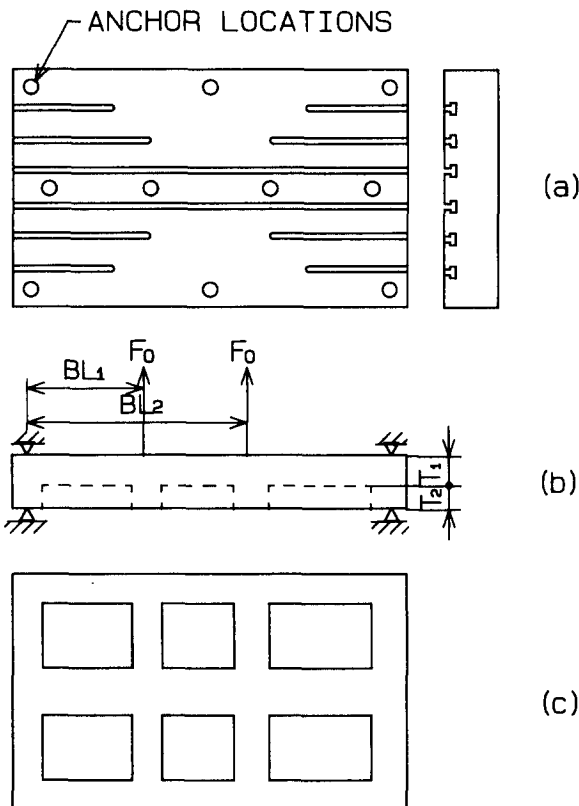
Geometry of the test bed ; (a) top view, (b) side view and definition and (c) bottom view.
